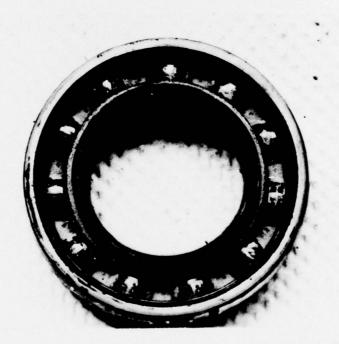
Bearing S/N TRL-40. Removed Position 3 With 64.4 Hours Time. Shown With Seal Removed.
